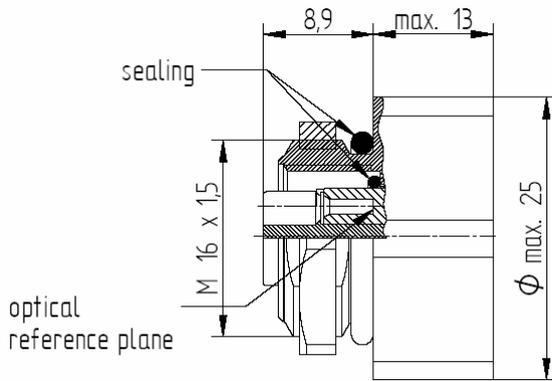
Fixed connector, electrical female contacts, single hole mounting thread M16 × 1,5 mounting orientation
